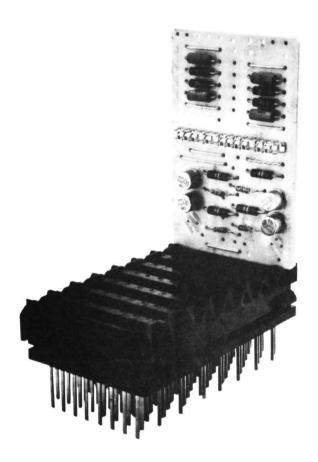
SMS Printed Circuit Card Inserted in Eight-Position Receptacle
